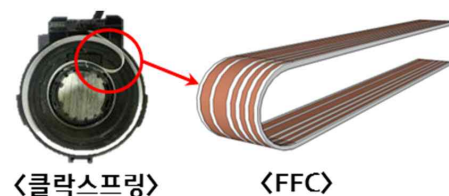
Structure of Steering Roll Connector (SRC) and Flexible Flat Cable (FFC)
